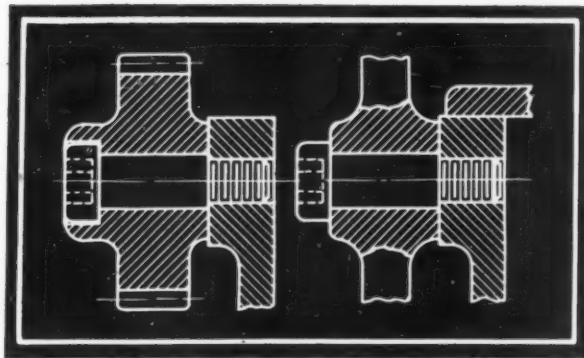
Standard hollow shoulder screws often can be used instead of special studs, at less cost
